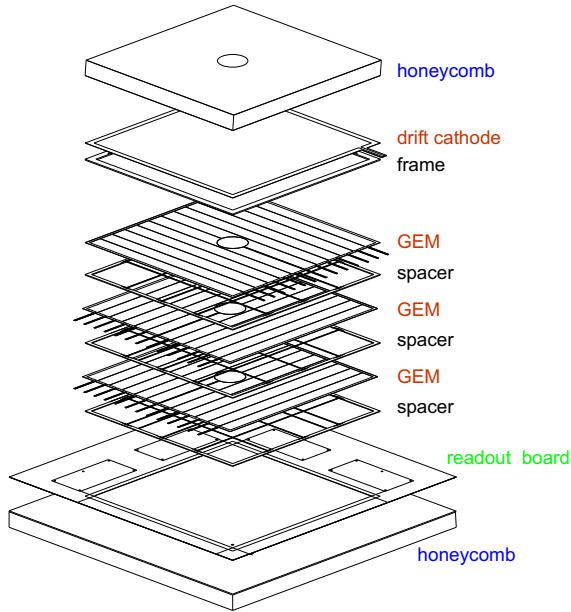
Exploded view of a COMPASS triple GEM detector.
